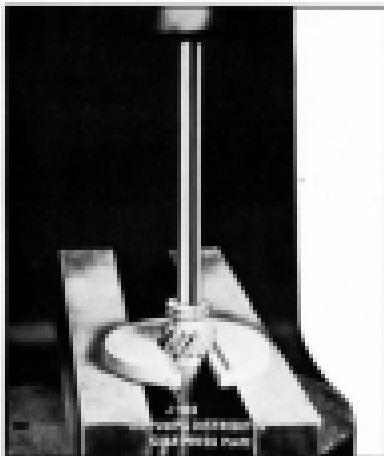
Removing Oil Pump Drive Gear with Tool J-874-1—Pump Removed from Engine
